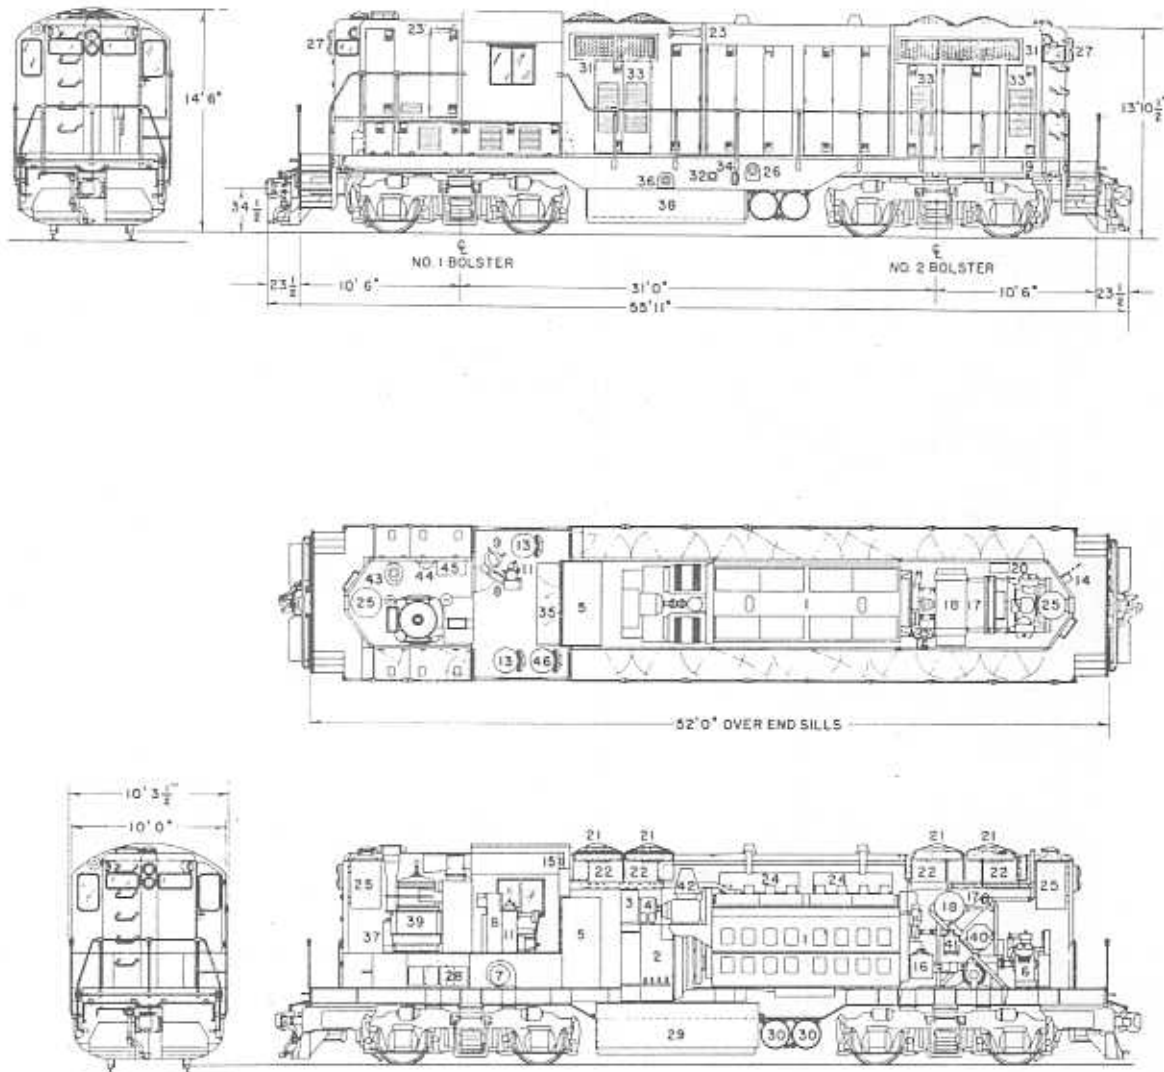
Physical Dimension and General Equipment Layout, General Motors Locomotive Model GP-7
